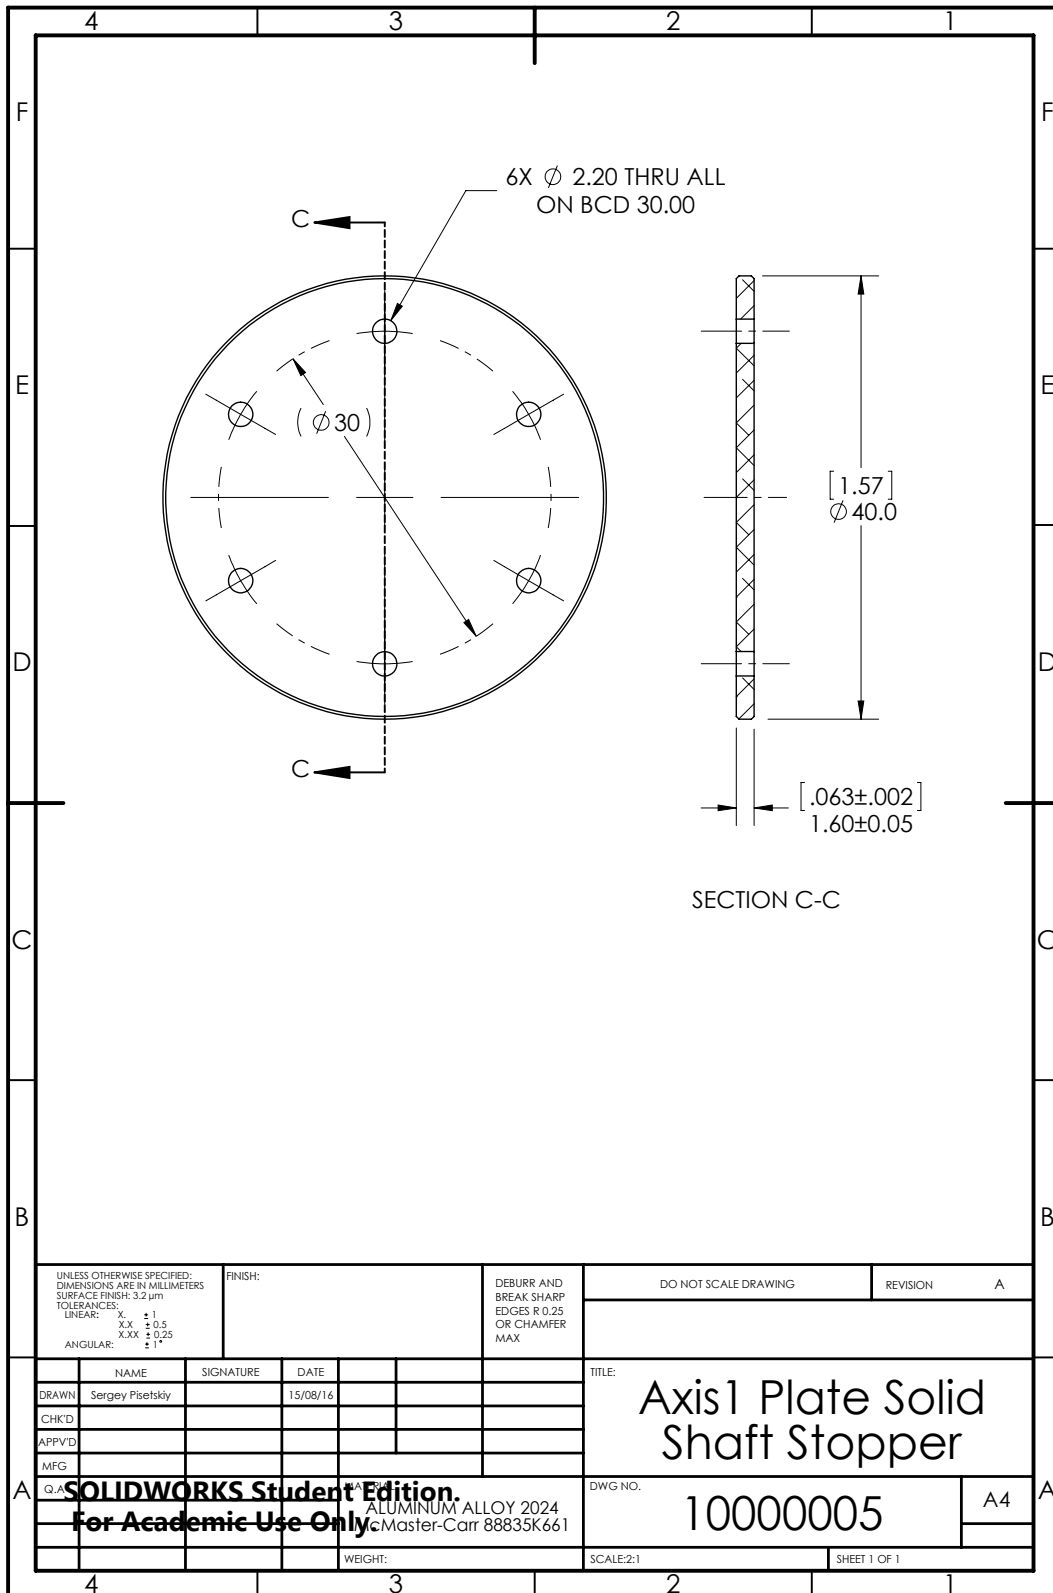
Drawing: Joint 1 solid shaft stopper.
